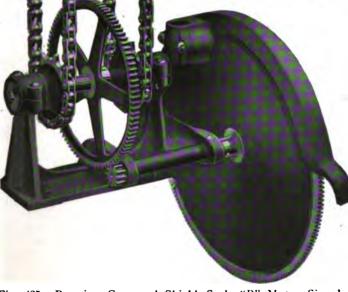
Running Gear and Shield, Style "B" Motor Signal.
